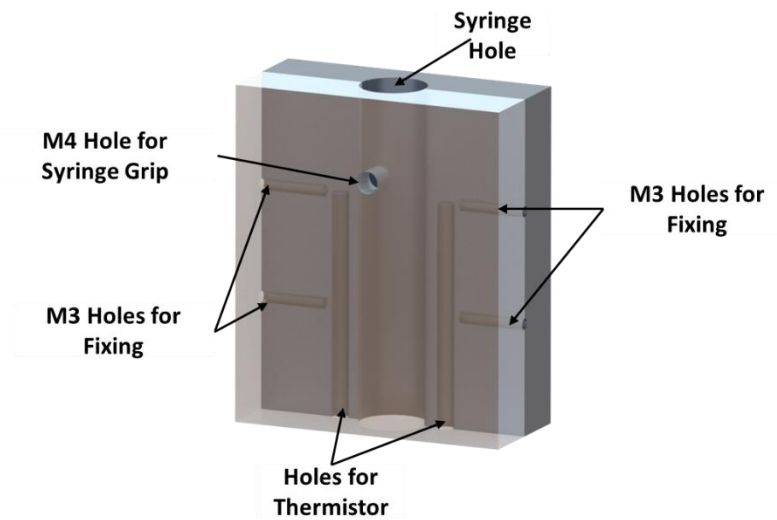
CAD model of syringe's aluminium heat sink. The block's geometric technical drawing can be found in the Annex, as it was machined to build the temperature control unit through machining processes carried out at LTO, Técnico, Lisbon.
